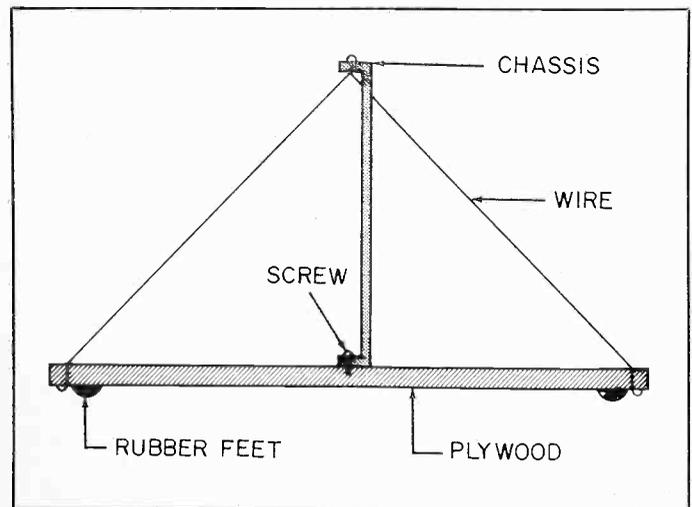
Drawing to illustrate vertical chassis mounted on plywood base.
